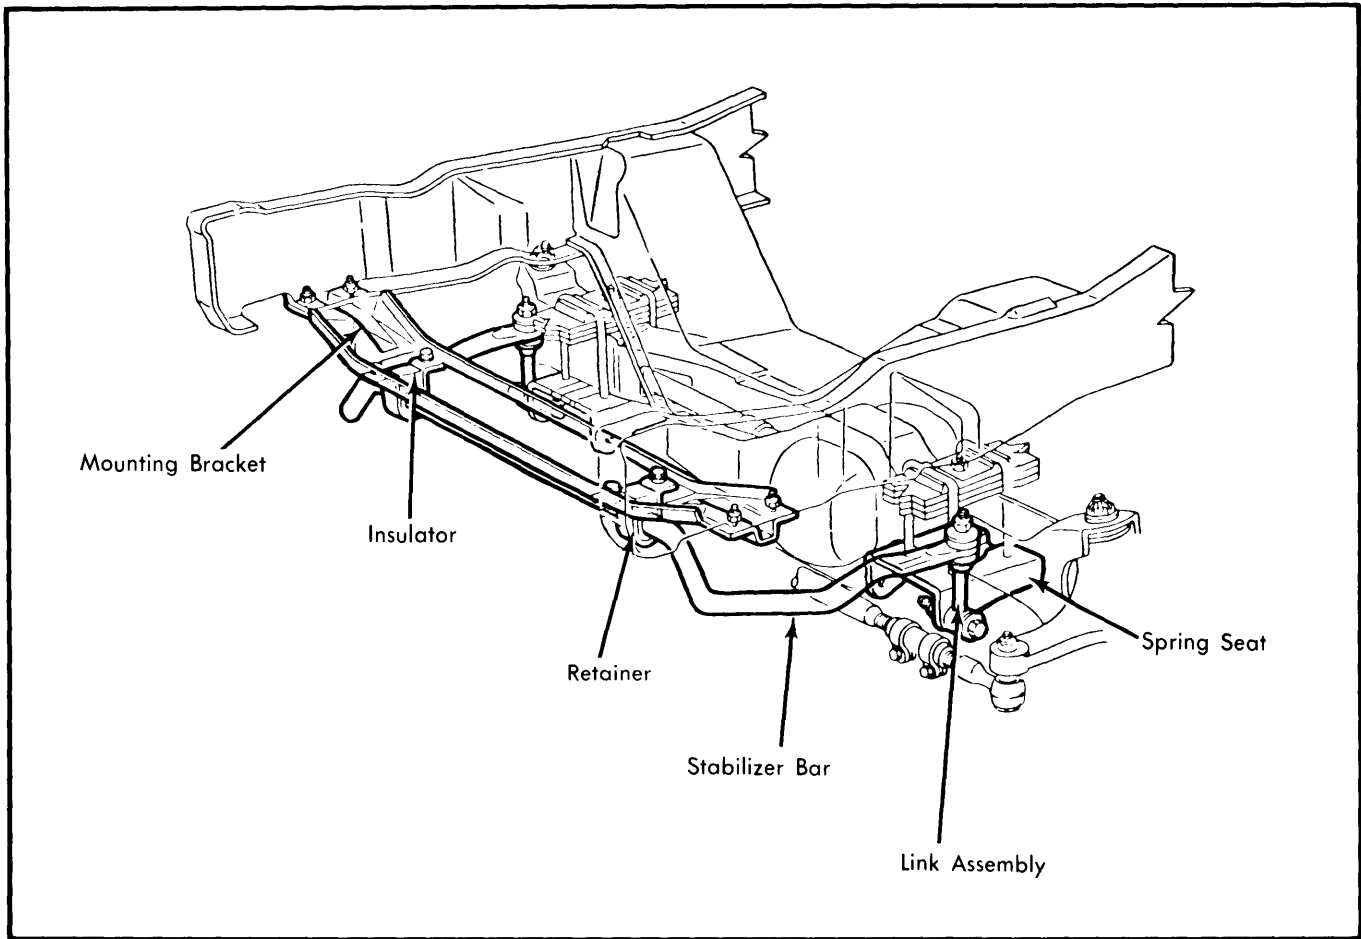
F250/350 Stabilizer Bar Assembly – (Other Models Similar)
